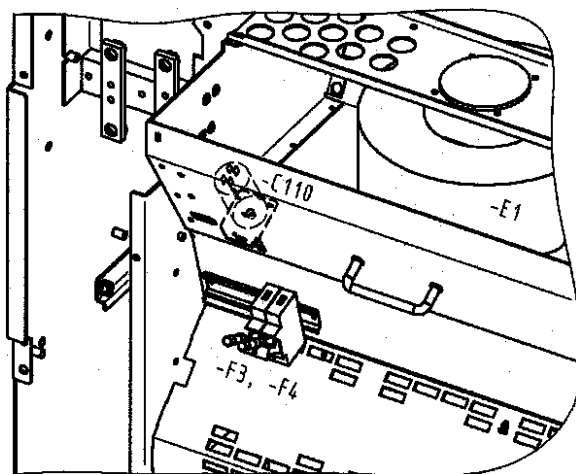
Fan assembly -E1, fan transformer primary fuse, starting capacitor -C110
